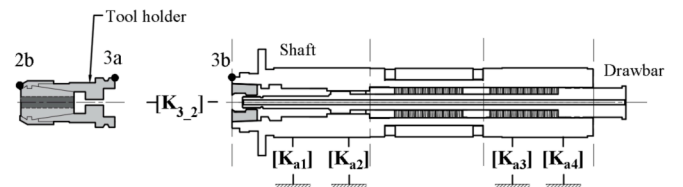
Models of the spindle supported by aerostatic bearings using RCSA method.
